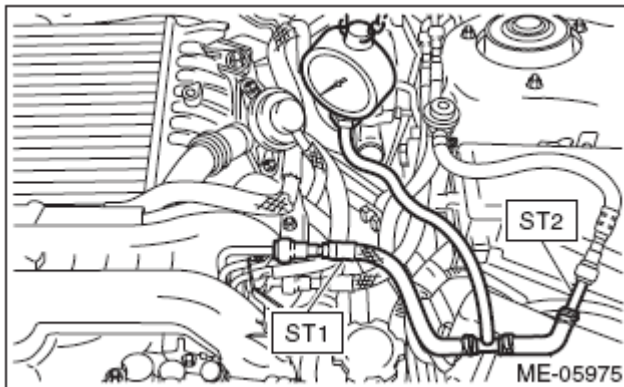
Connecting Fuel Pressure Gauge Using Fuel Hose And Fuel Pipe Adapter
